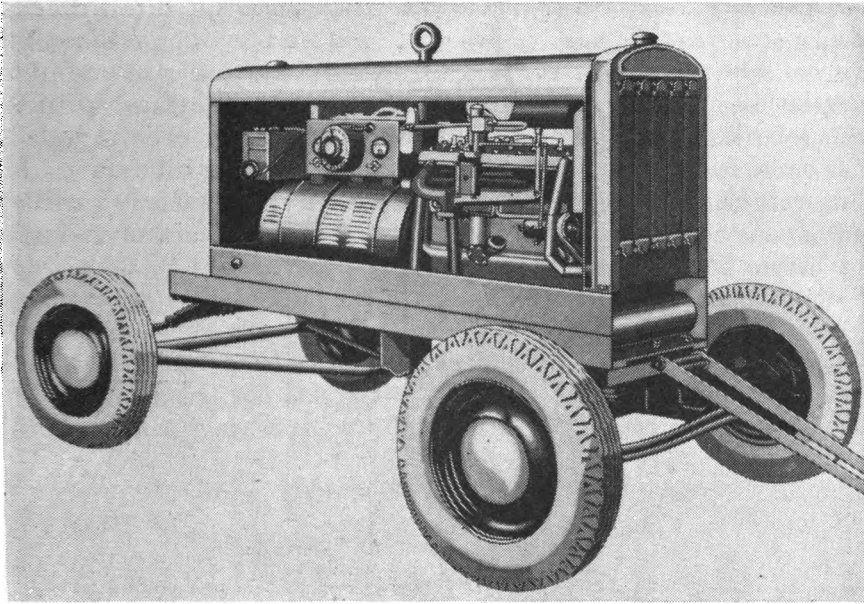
Gasoline engine-driven d. c. arc welder.
